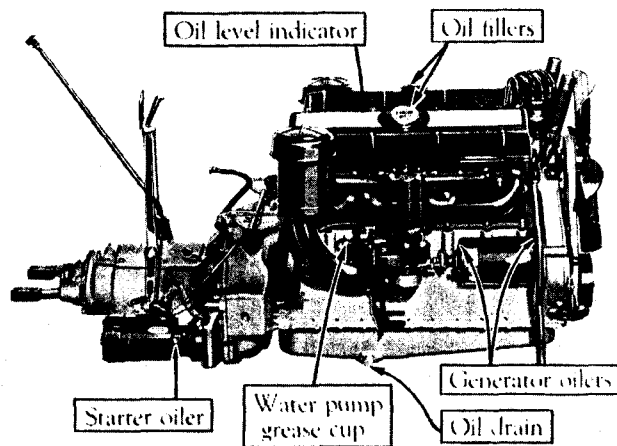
Showing the location of the oil fillers, oil level indicator, oil pan drain plug and other lubrication features.
